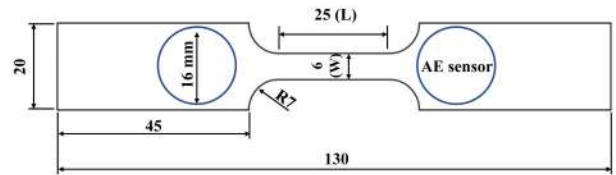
Specimen specification of tensile test specimen (unit: mm)
